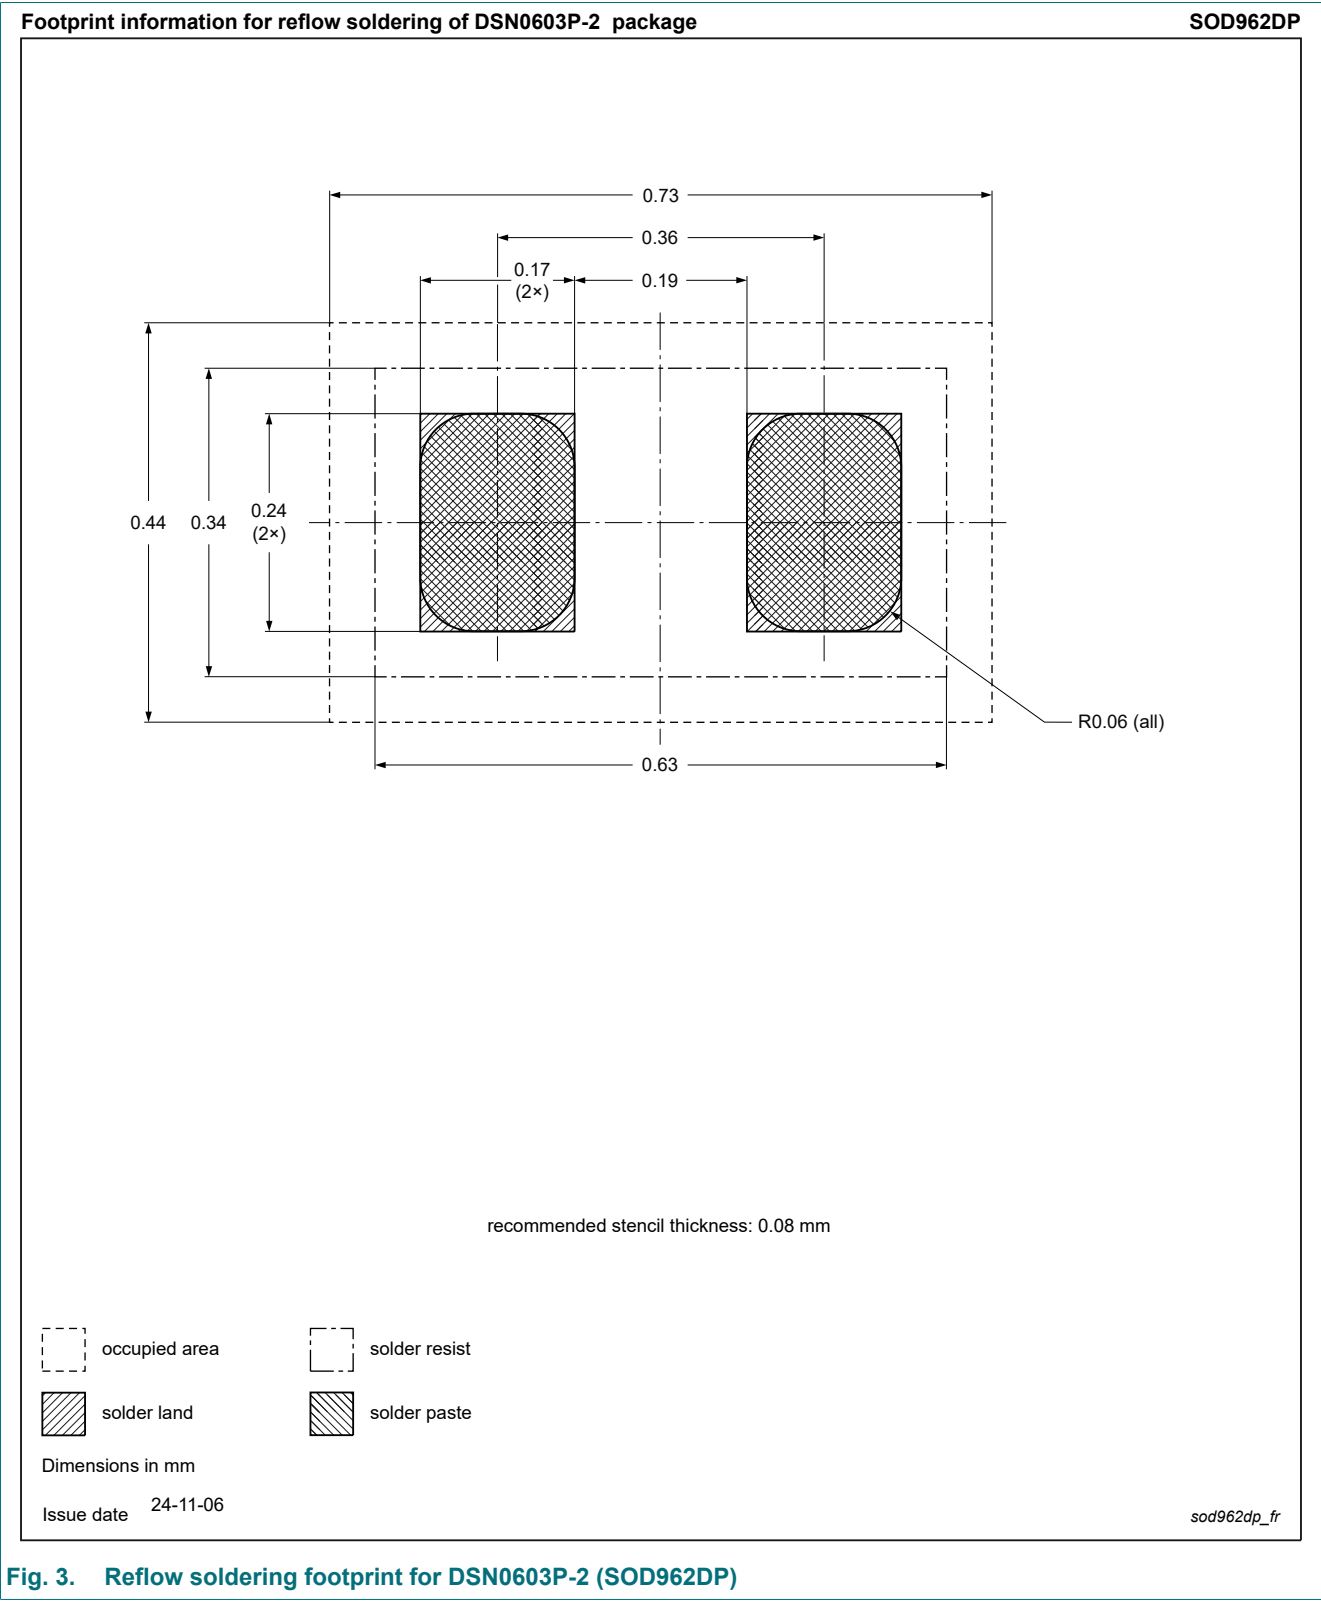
Reflow soldering footprint for DSN0603P-2 (SOD962DP)
